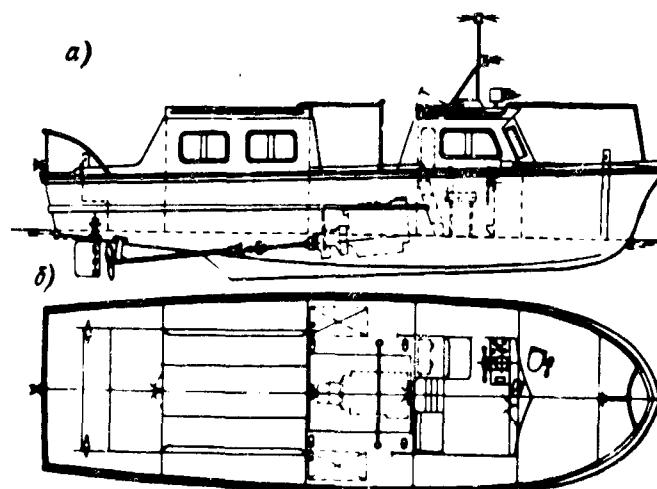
Pleasure Launch made of Reinforced Concrete. a- longitudinal section; b- top view
